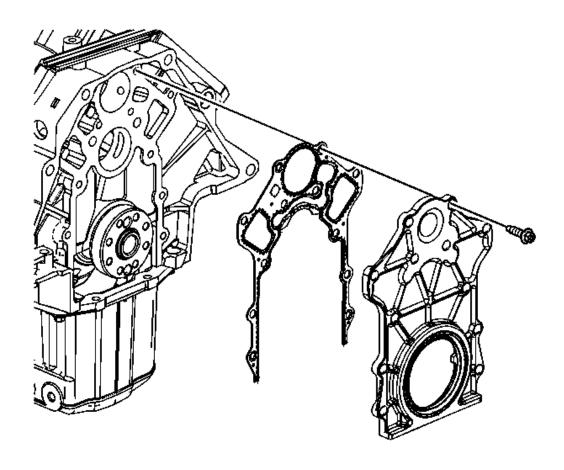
Crankshaft Rear Oil Seal & Housing (Second Design) Courtesy of GENERAL MOTORS CORP.
